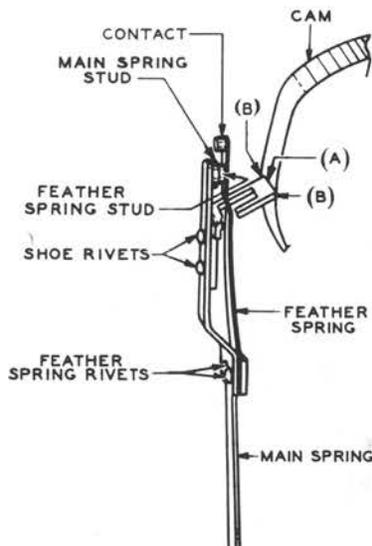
Position of Shoe on Spring Assembly Without Shoe Bracing Bracket
